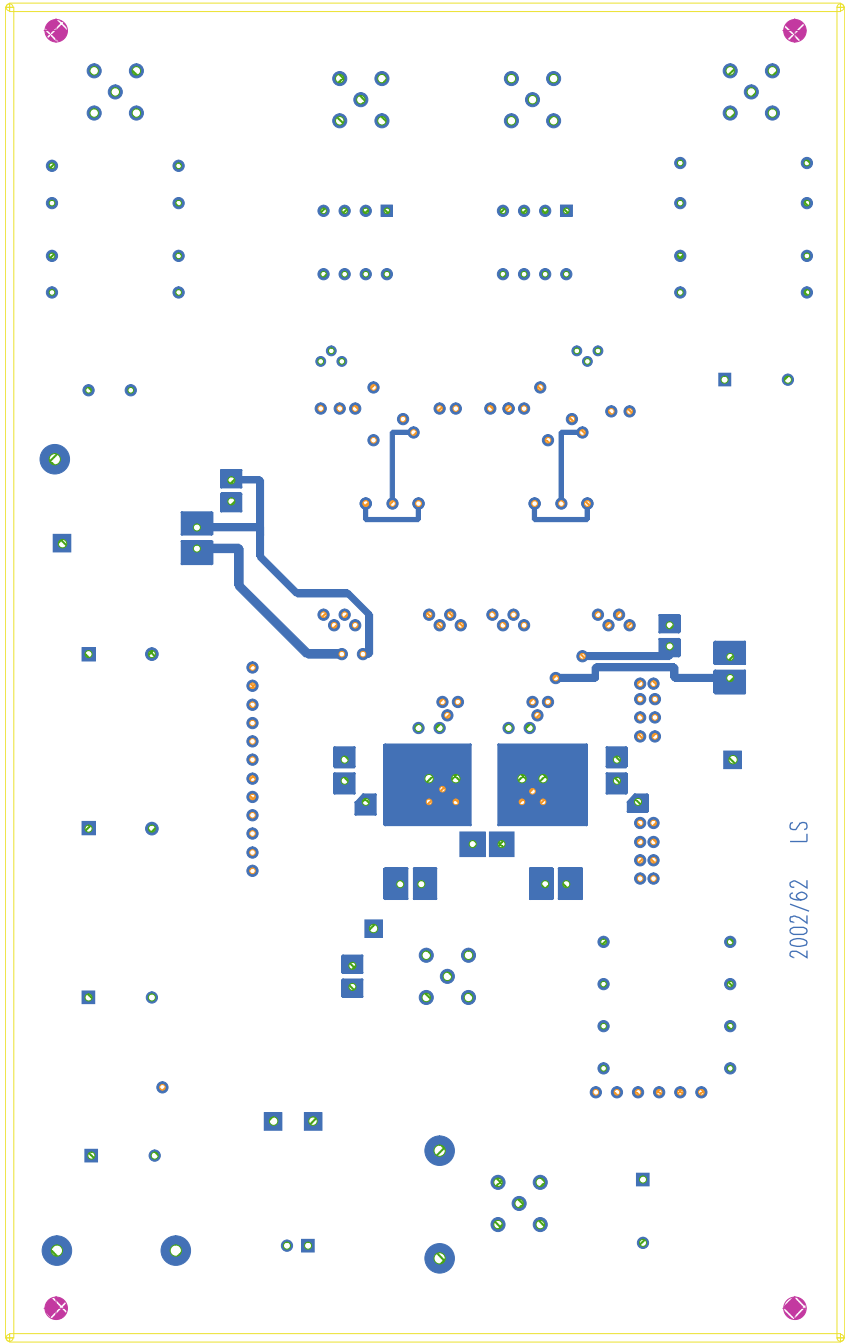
PCB design of inner layer corresponding to the test board of Fig. G.1
